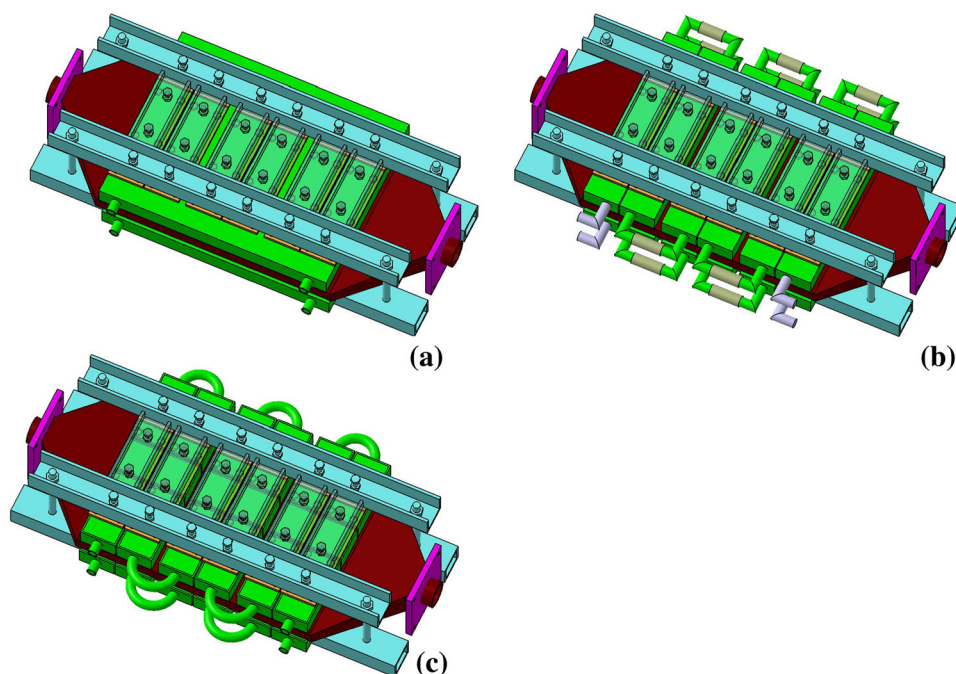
Three-dimensional model of TEG system using plate-shaped (a), stripe-shaped (b), and diamond-shaped (c) TEC.
